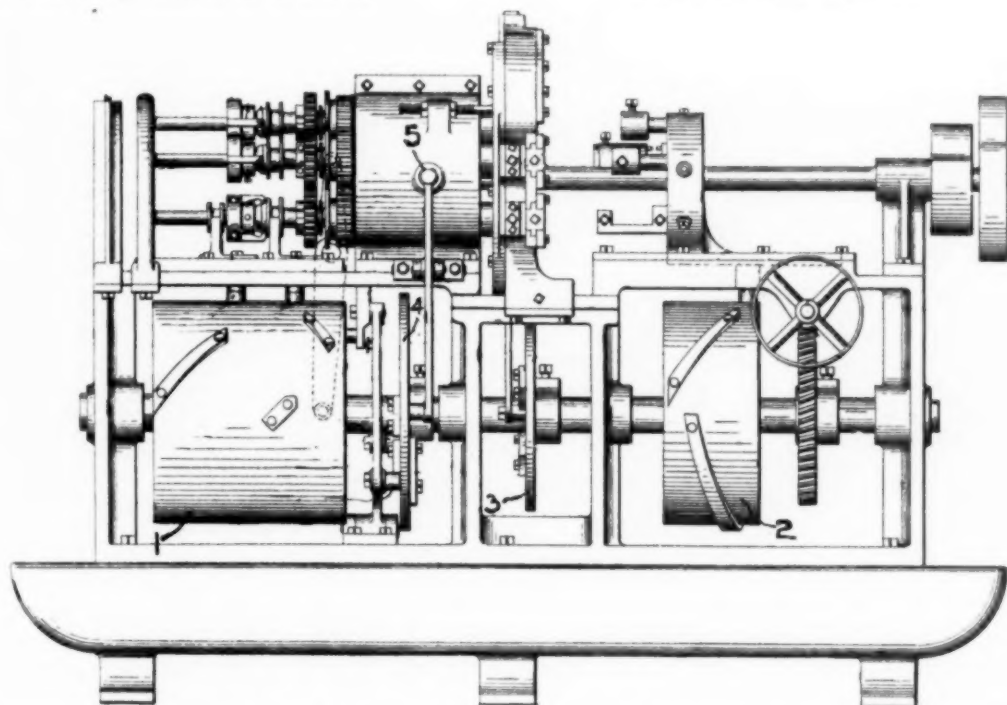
SPENCER TYPE MULTIPLE SPINDLE MACHINE SHOWING USE OF STRAP DRUM CAMS. NEW BRITAIN MACHINE CO.
